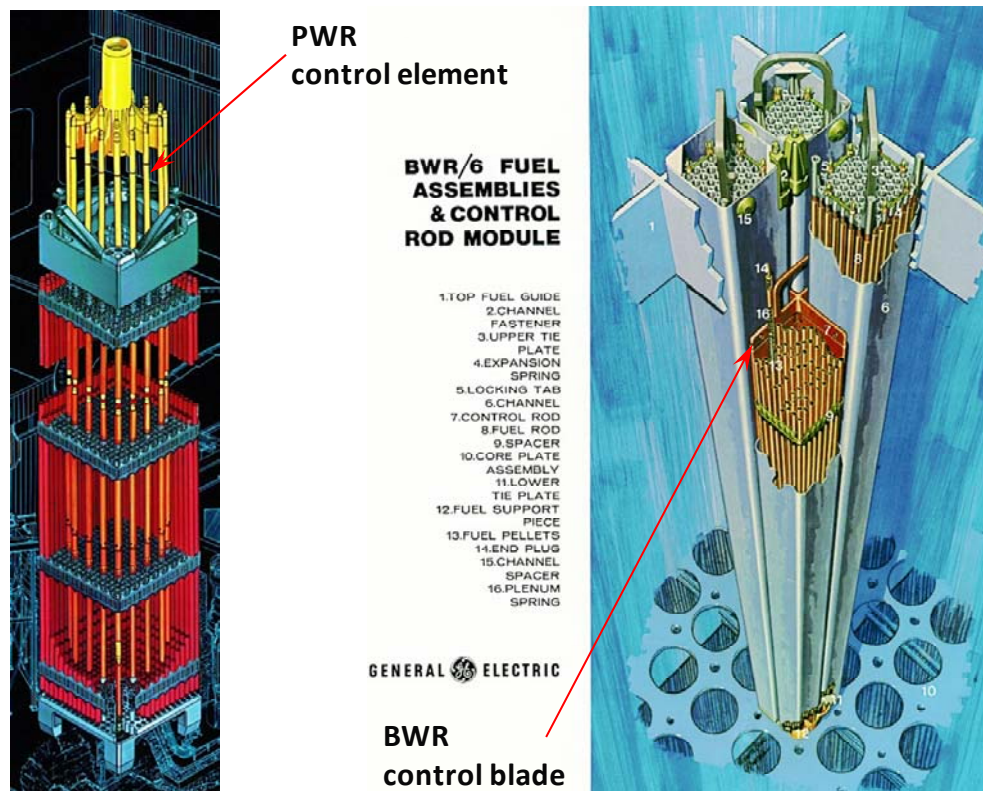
Differences in PWR and BWR control element designs. On the left, a PWR fuel assembly with partially inserted control rods and, on the right, a BWR control cell consisting of four fuel elements with cruciform control blade partially inserted. (By courtesy of Westinghouse and General Electric. Source: [www.nucleartourist.com/systems/pwrfuel1.htm](http://www.nucleartourist.com/systems/pwrfuel1.htm)). SIMULATE-5 modelling of an odd-number of assembly rows automatically assumes PWR control element geometry.
